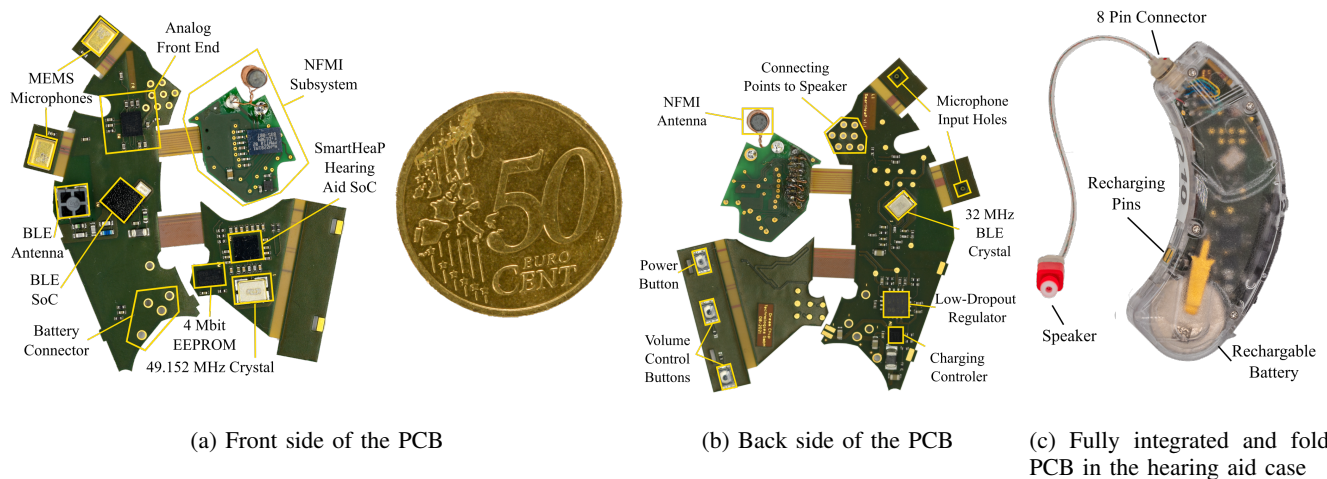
Integrated demonstration platform of the research hearing aid on a six-layer flex PCB with all the different electrical components.
